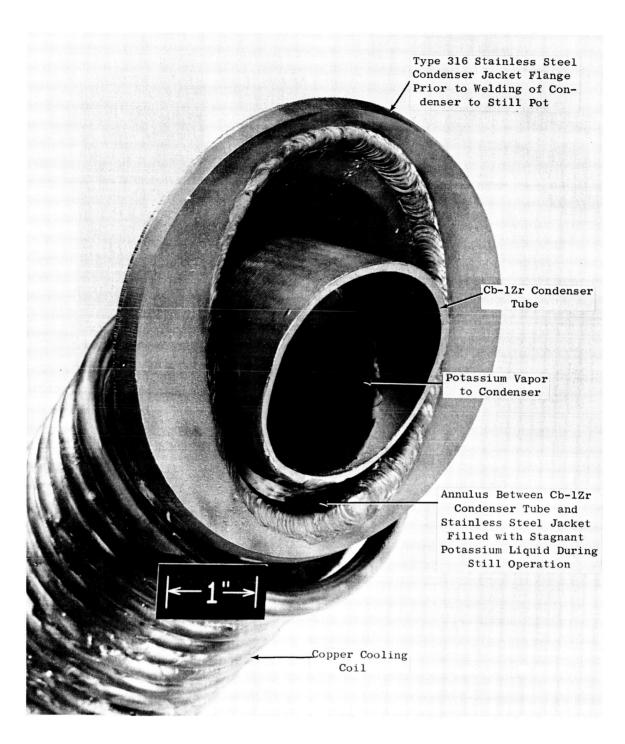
High Vacuum Potassium Still, Partially Assembled, Showing Annular Arrangement of Cb-lZr Inner Tube and Type 316 Stainless Steel Outer Tube of Condenser. Potassium in the Annular Space Provides Heat Transfer for Condensing. (Orig. C65040929)
